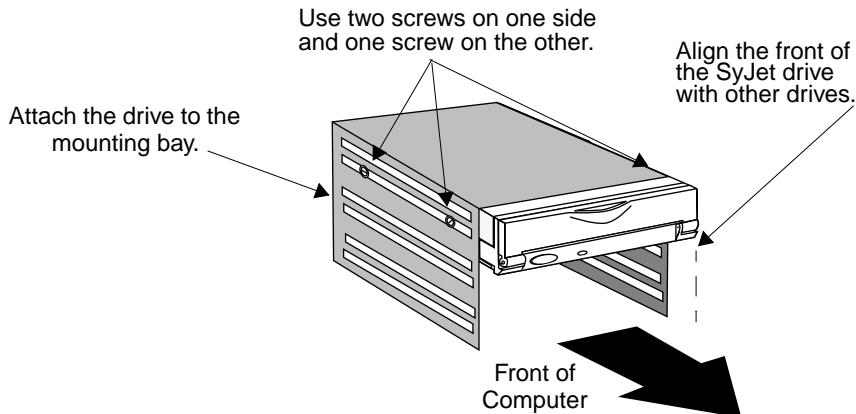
Mounting the Drive in a 3.5-inch Mounting Bay
